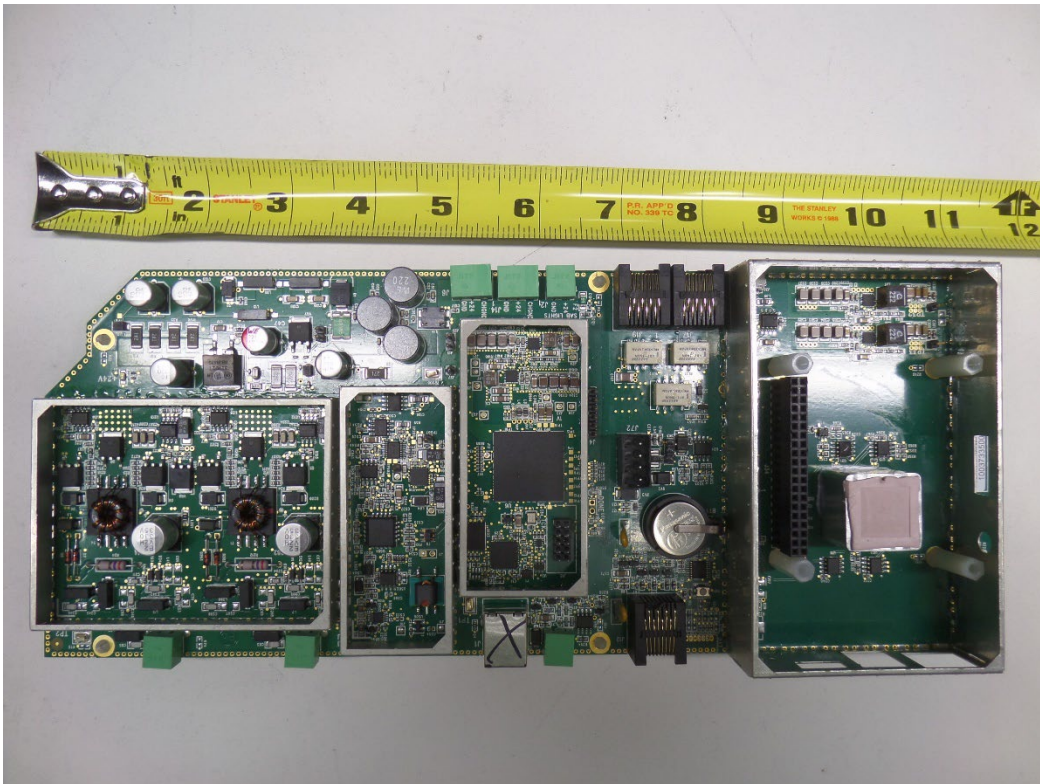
NG12 PRI/PAB RF PED EAS RF BOARD TOP SIDE ROCK64 BOARD REMOVED
